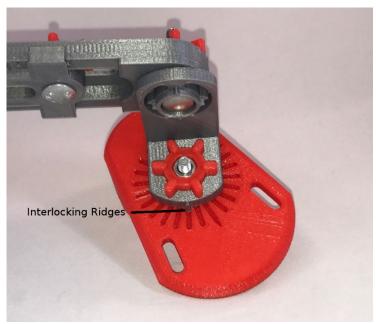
Attachment of the footpads to the assembly via angle brackets with interlocking ridges to lock footpads into place.
